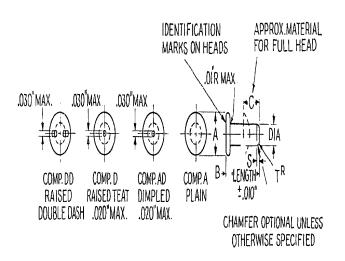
AN425 countersunk and AN430 roundheaded aluminum rivets.
